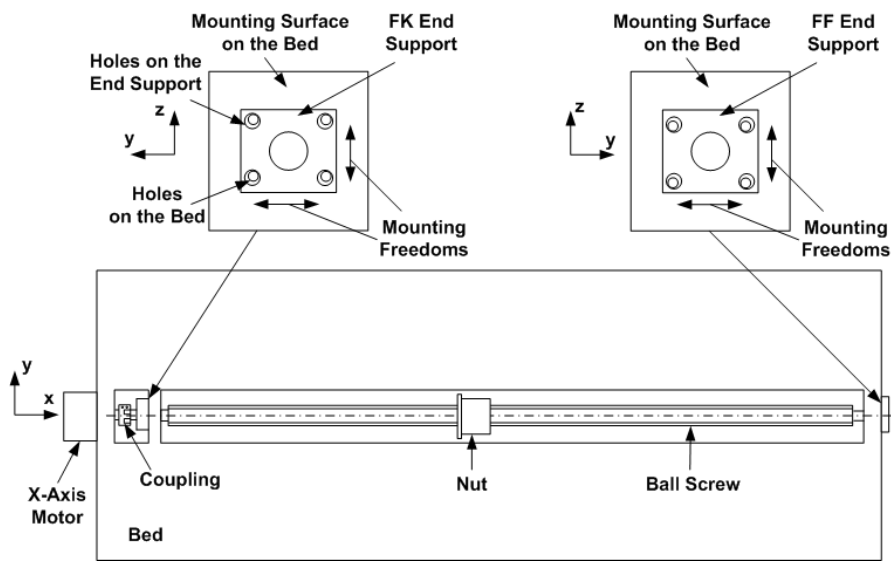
Schematic view of the end supports used for ball screw mounting
